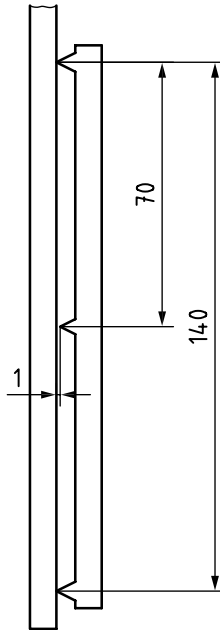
Apparatus for testing straightness of Westergren tubes
